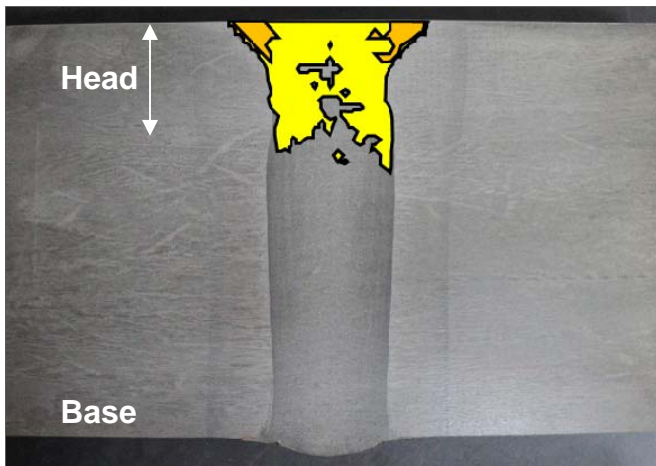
Longitudinal Cross Section of an Orgo-Thermite Head Alloyed Thermite Weld showing Weld Regions Harder than 380 BHN (yellow) and 400 BHN (orange)
